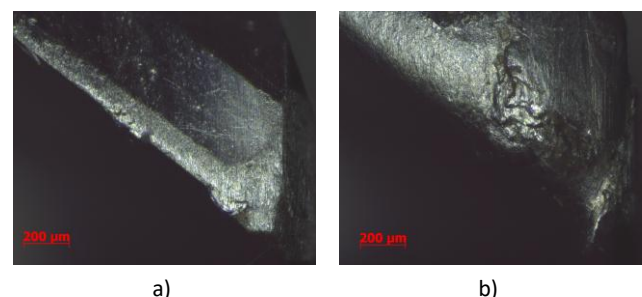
Tool wear of a) untreated and b) treated tools under 30 m/min cutting speed
